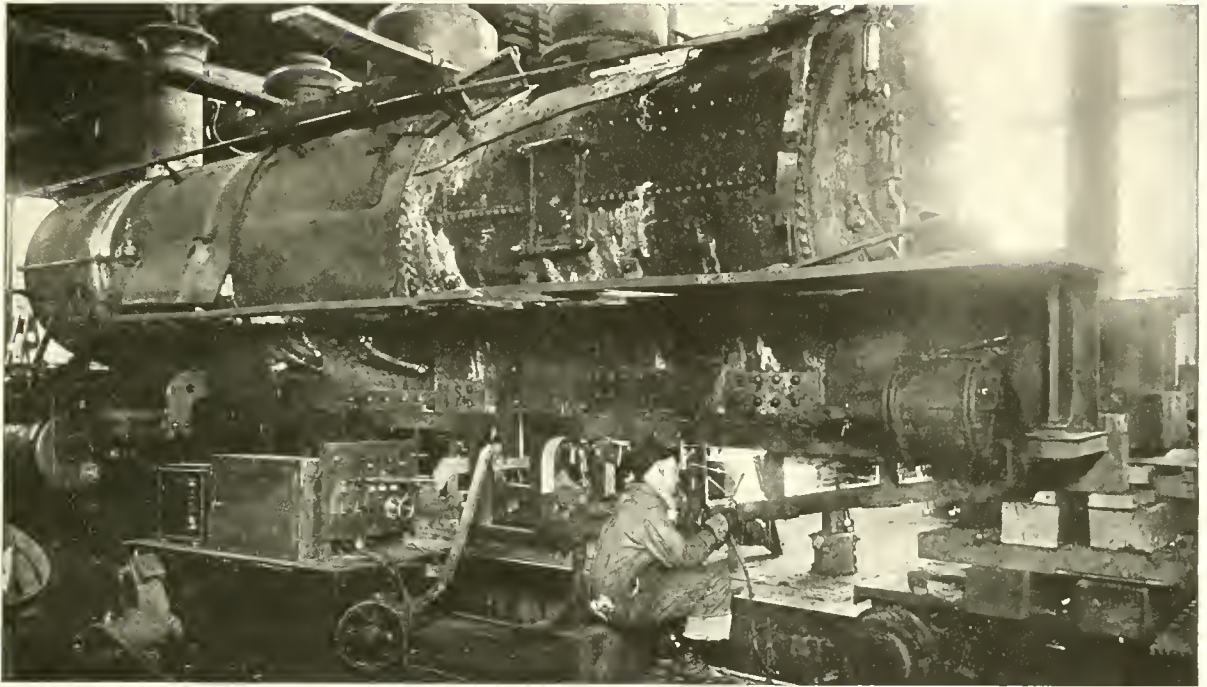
Welding a locomotive frame using a portable Lincoln Arc Welder. The same week that this photo was taken \$6 000 was saved through arc welding done on this welder.
